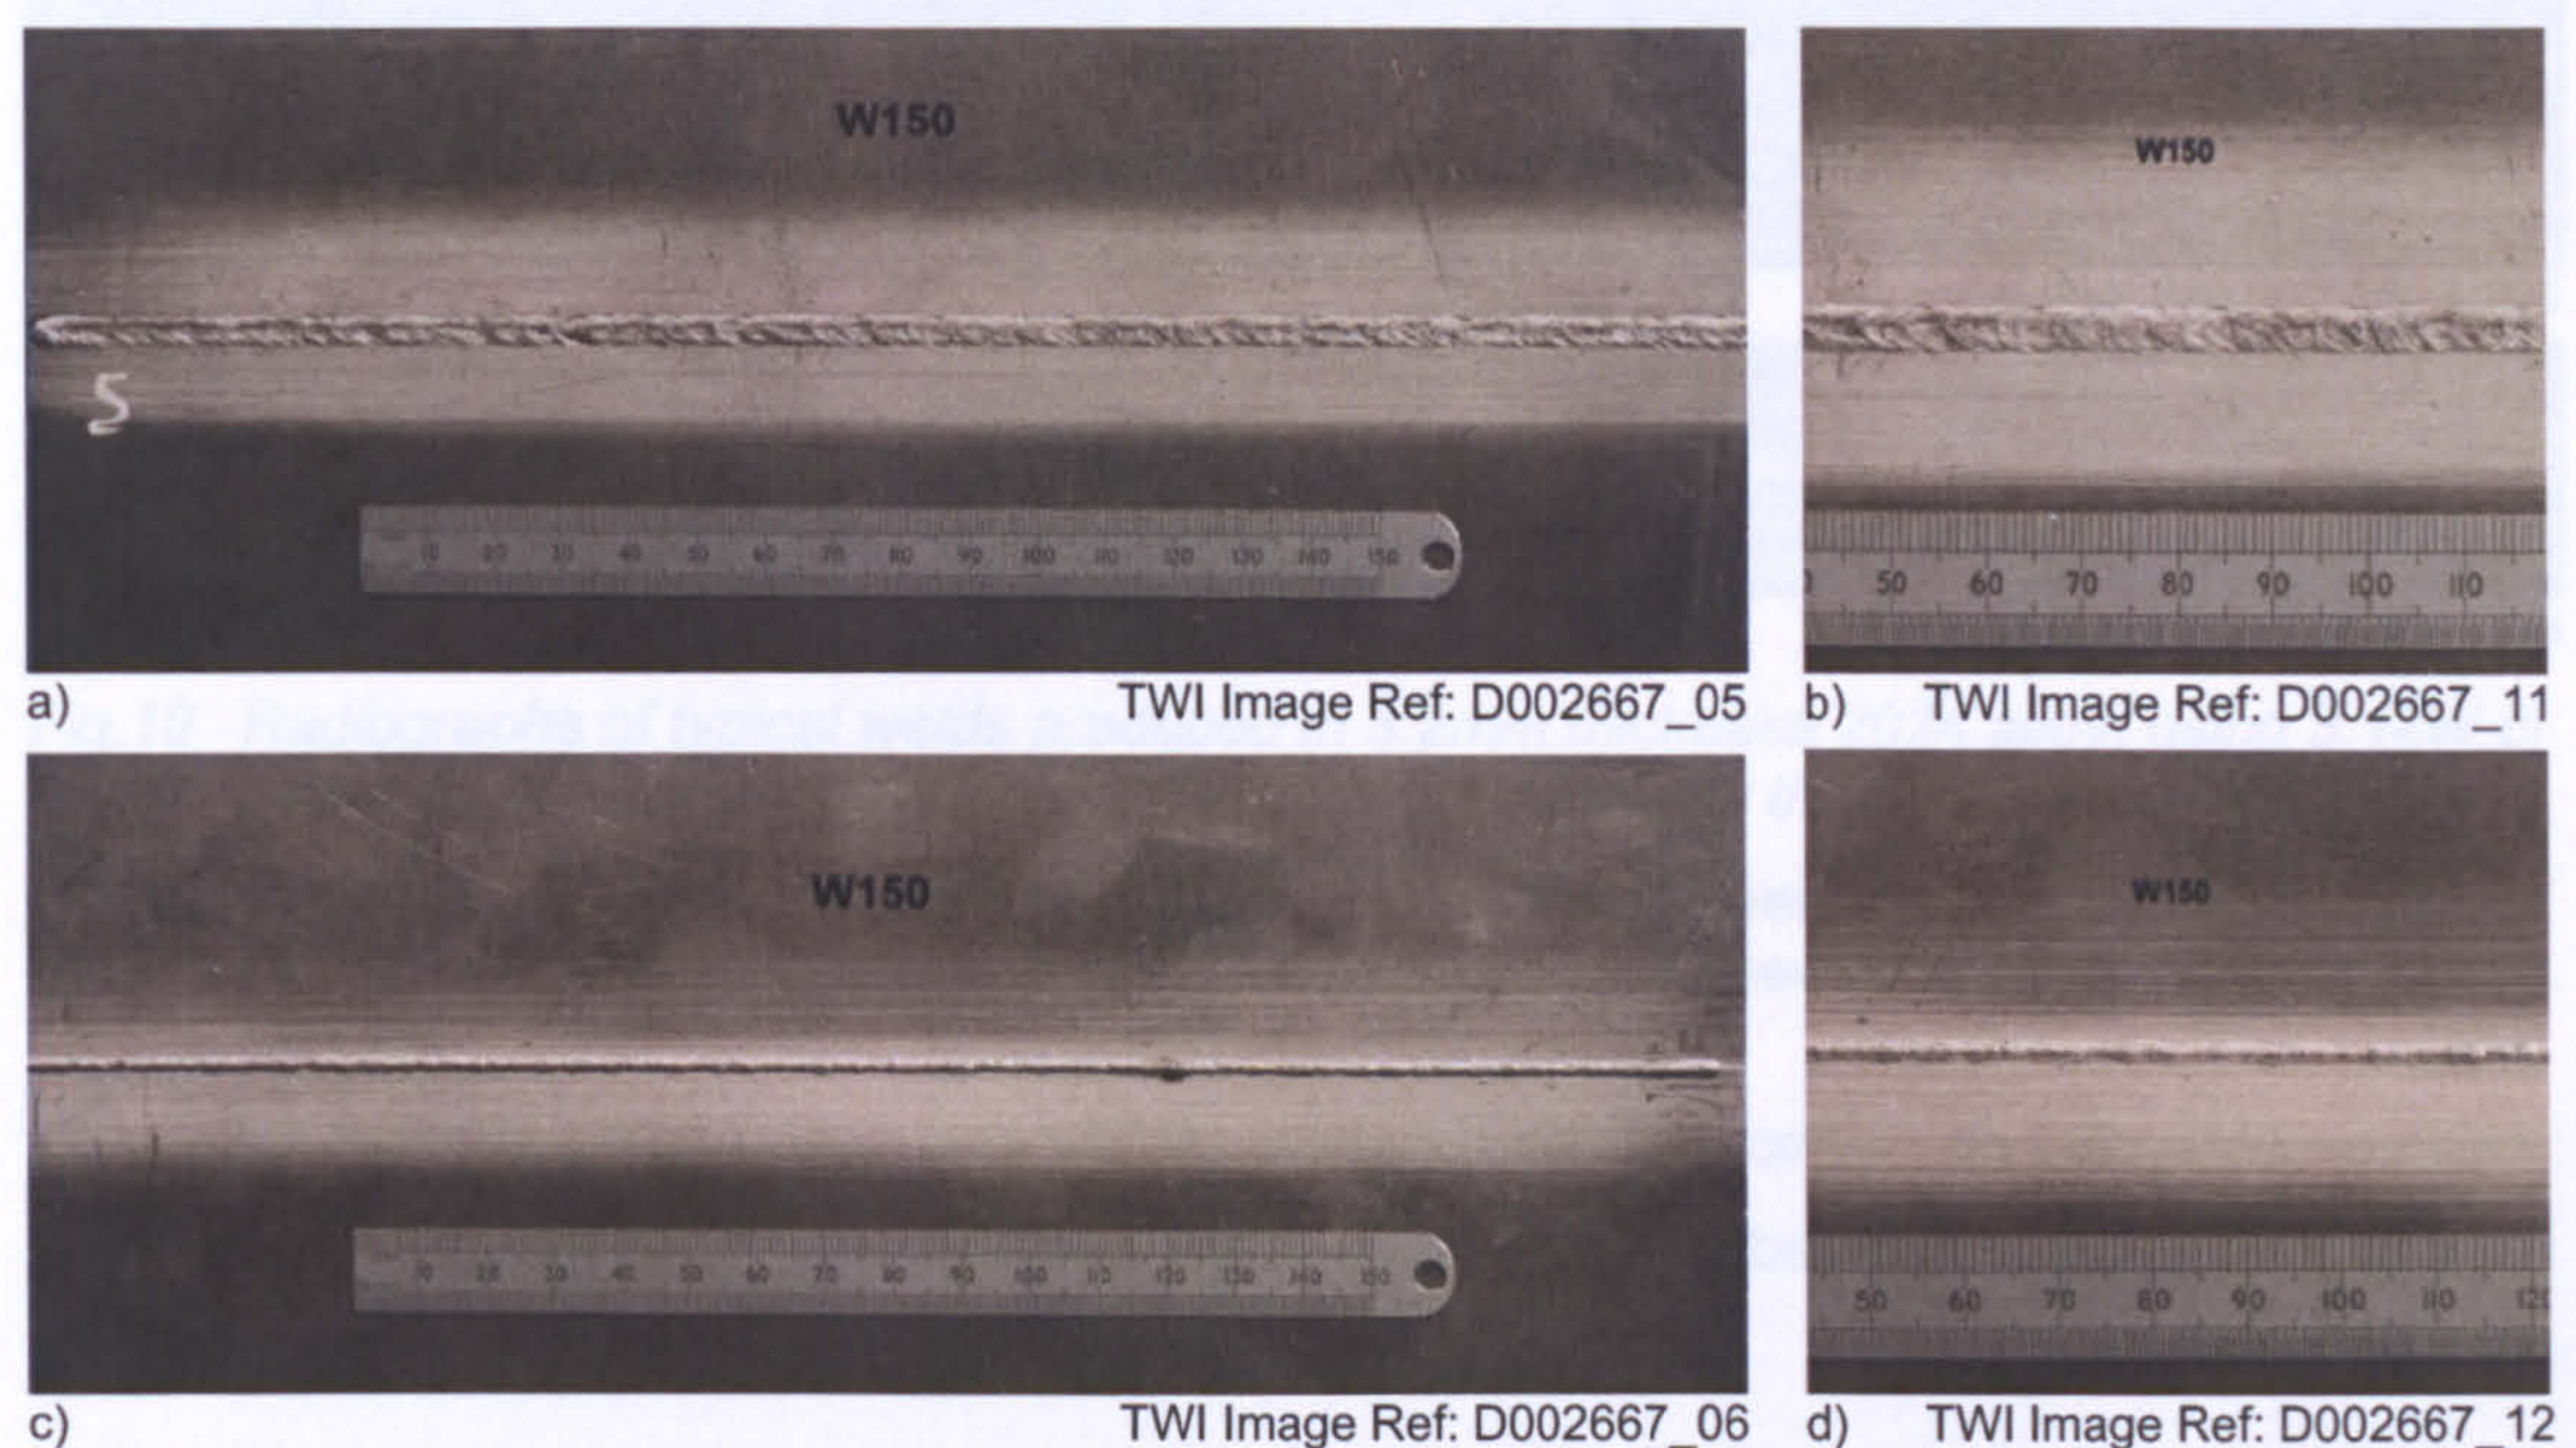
A typical weld produced in 3.2mm thickness 2024 alloy, using 3.1kW of laser power, Ø0.6mm laser spot, defocus -1mm, welding speed 1.4m/min, WFS 1.25m/min:
